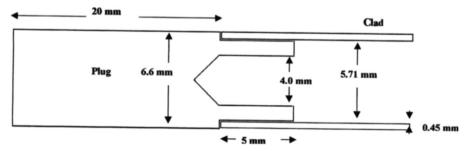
Schematic of SS 316 LN plug and SS alloy D9 tube used for making PFBR fuel pin.
